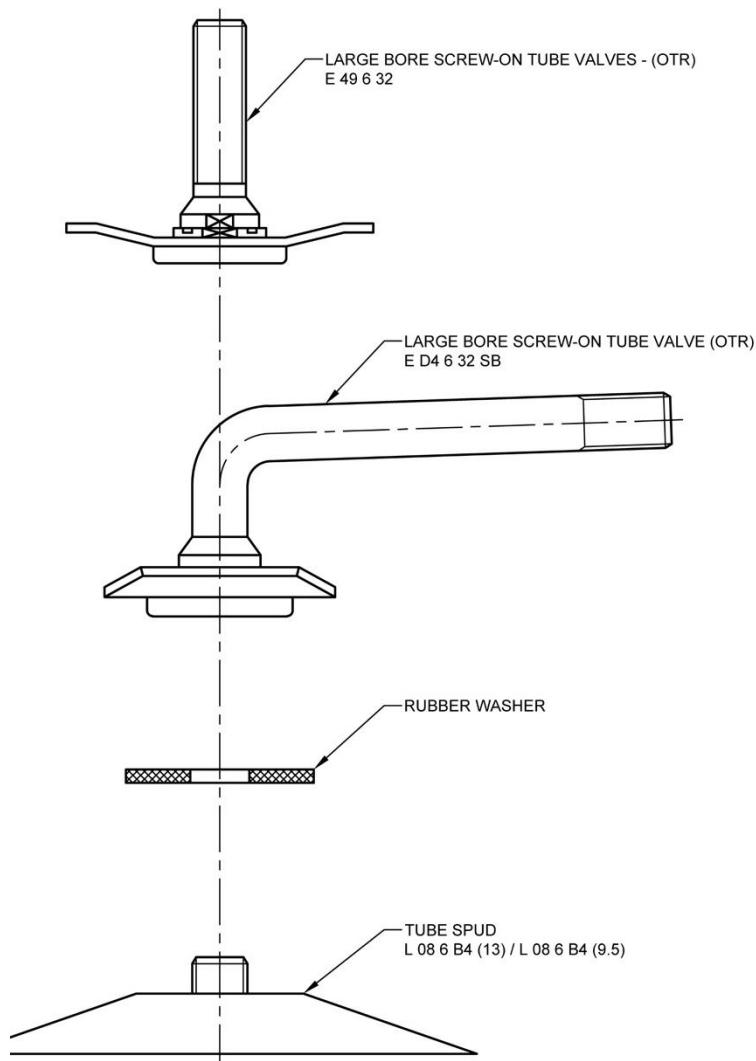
LARGE BORE SCREW-ON TUBE VALVES — (OTR) E 49 6 32
